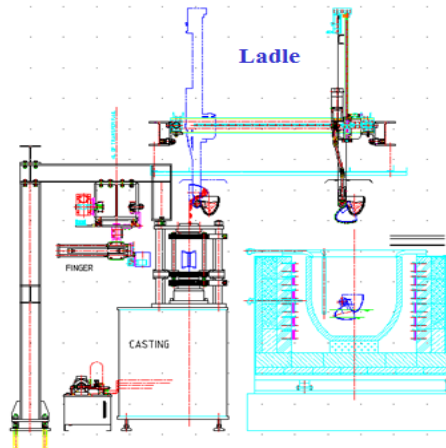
Centrifugal casting machine and conduction ladle equipment
